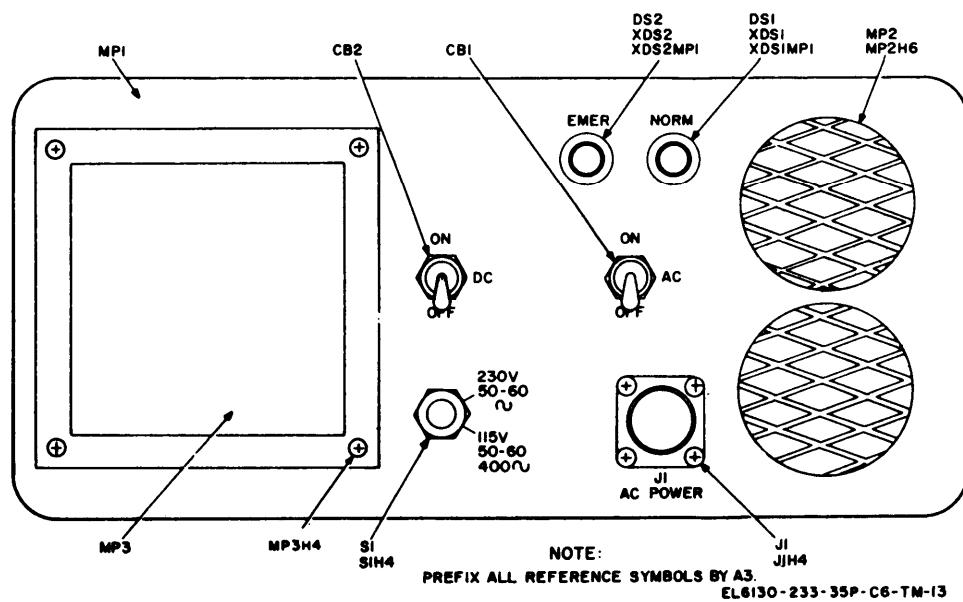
Front Panel Assembly of Power Supply PP-2953B/U.
